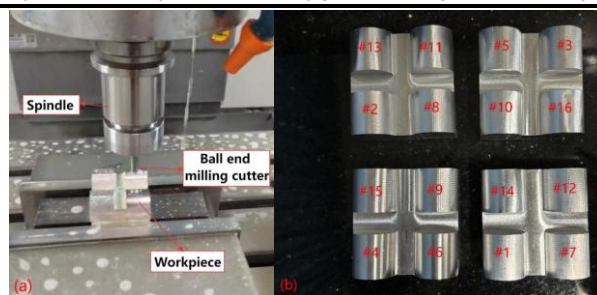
Milling process and milled workpieces under different parameter settings: (a) Milling process; (b)
